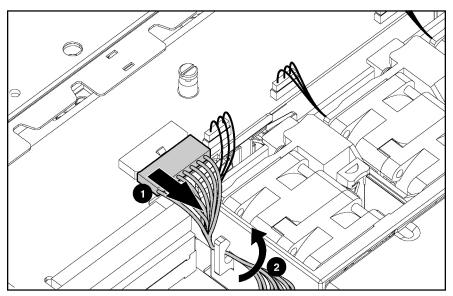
Disconnecting the optical device/diskette drive interface board power cable
